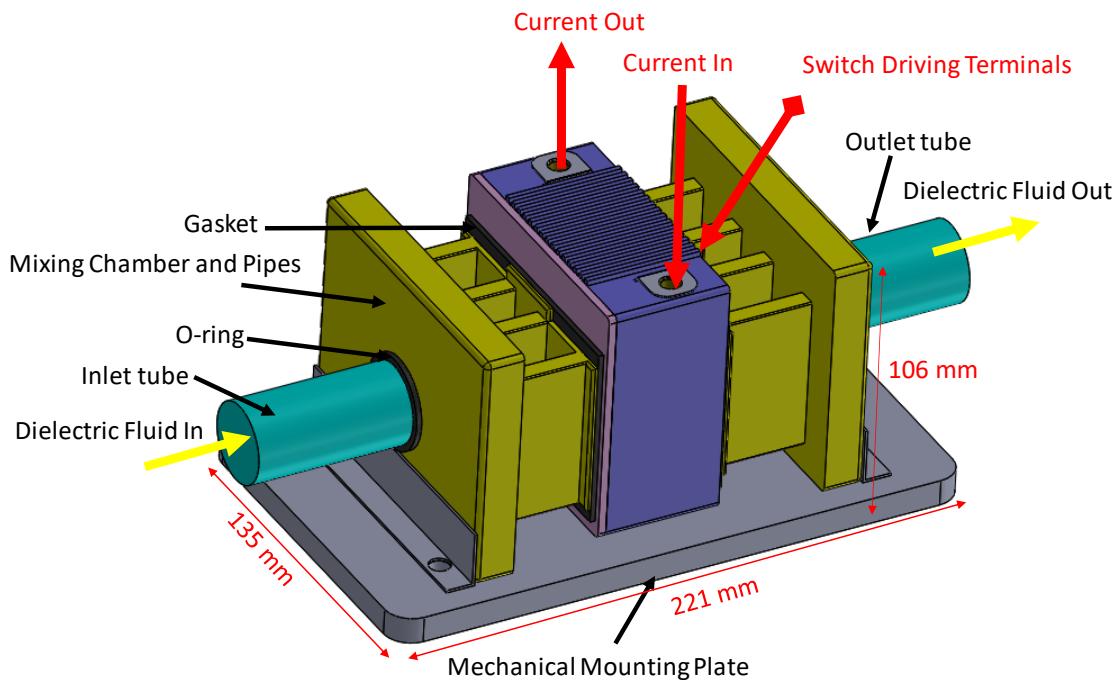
(c): Mounting and cooling chamber assembly with the 2S-3C-2C-2C 24kV Cascaded SuperCascode Power switch
